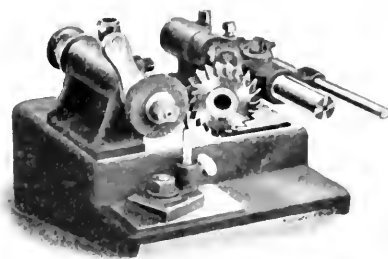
Cutter Grinder Set for Sharpening Angle Cutter.
